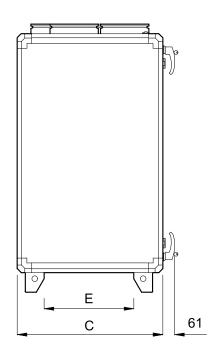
Dimension (mm) Topvex SX04-06 (drawn as right hand unit)
